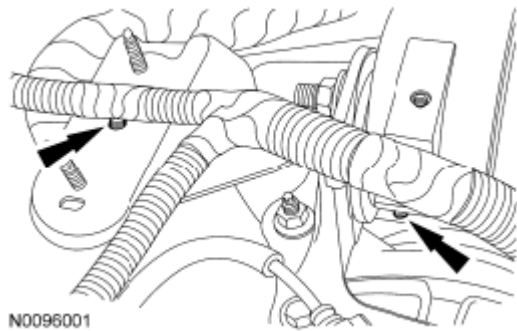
Locating Negative Battery Cable Pin-Type Retainers
